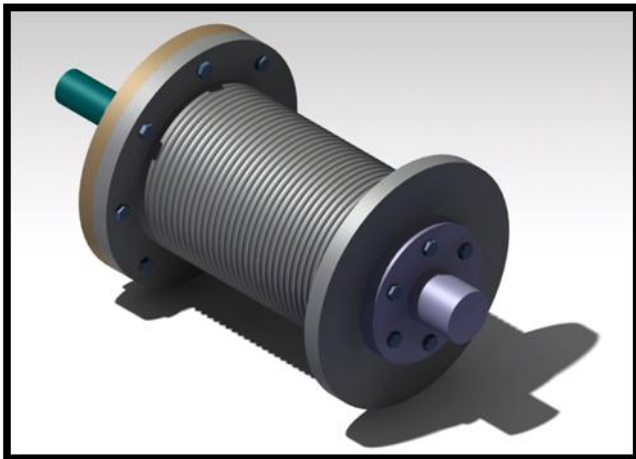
Rope drum and shaft assembly CAD model (CATIA)
